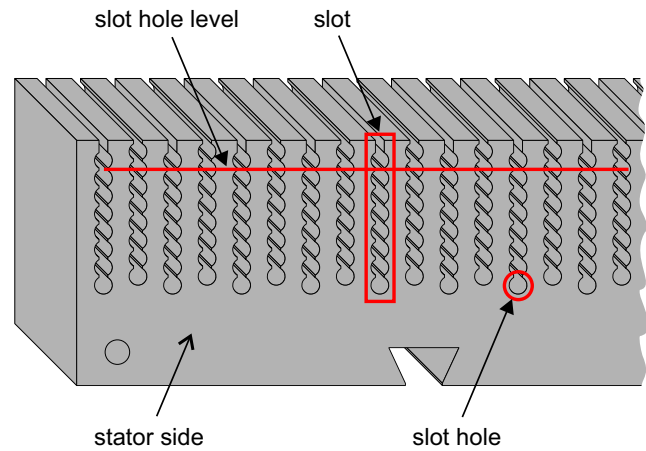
Definitions of some key parts of the UU WEC stator section design.
